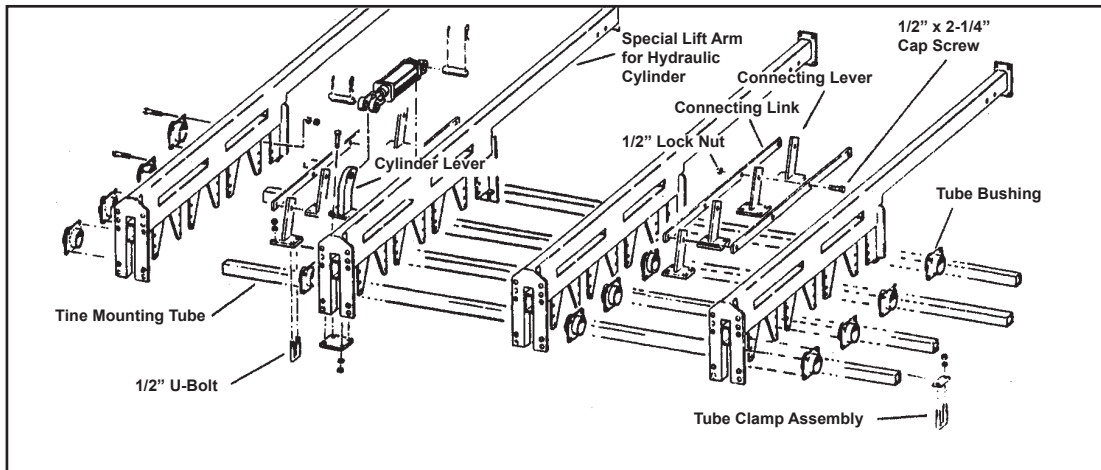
Lift arms and tine tube assembly – 4-Rank
